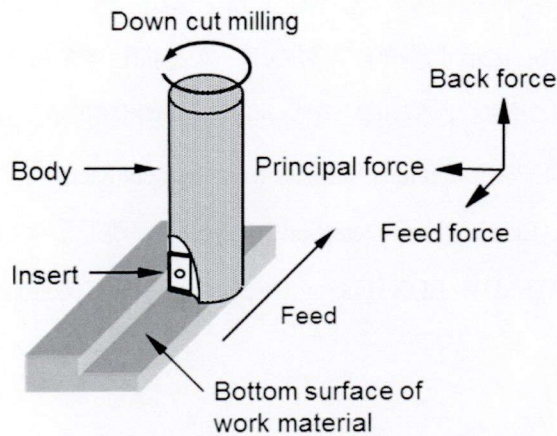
Schematic sketch of the body geometry and the cutting forces for the milling test.
